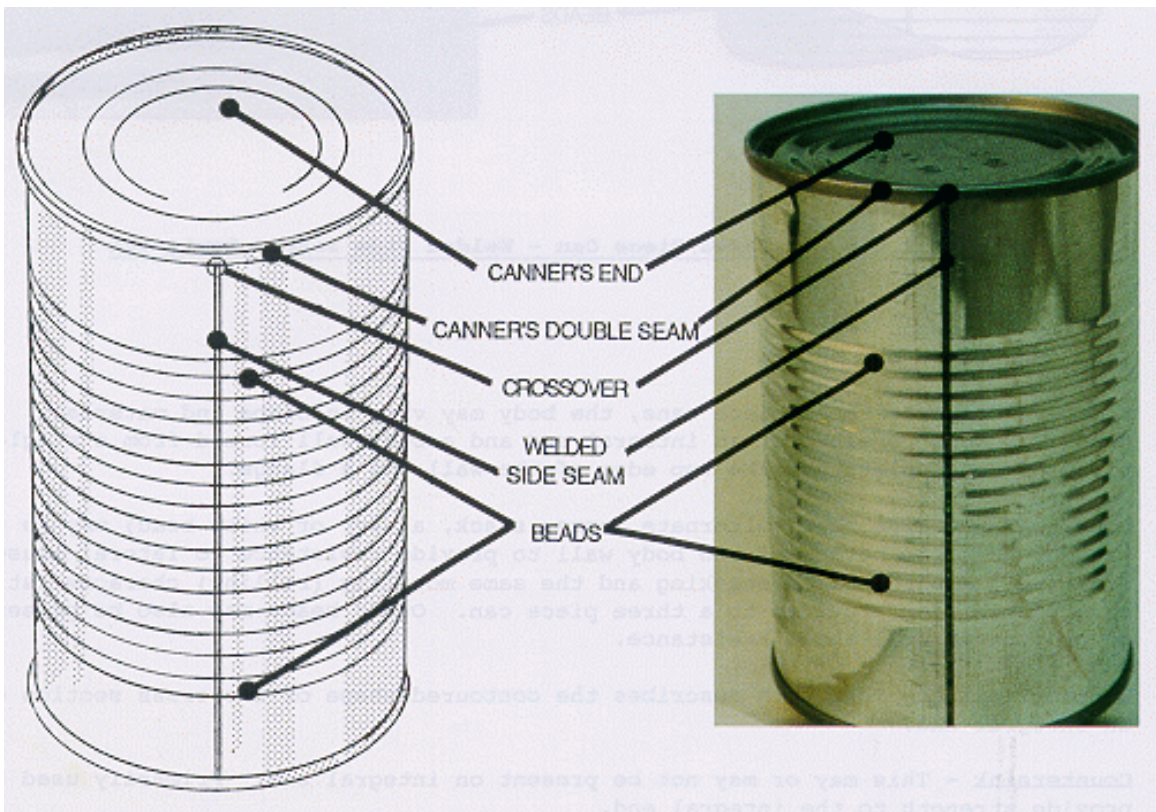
a - Three Piece Can - Welded Side Seam - Filled Can
